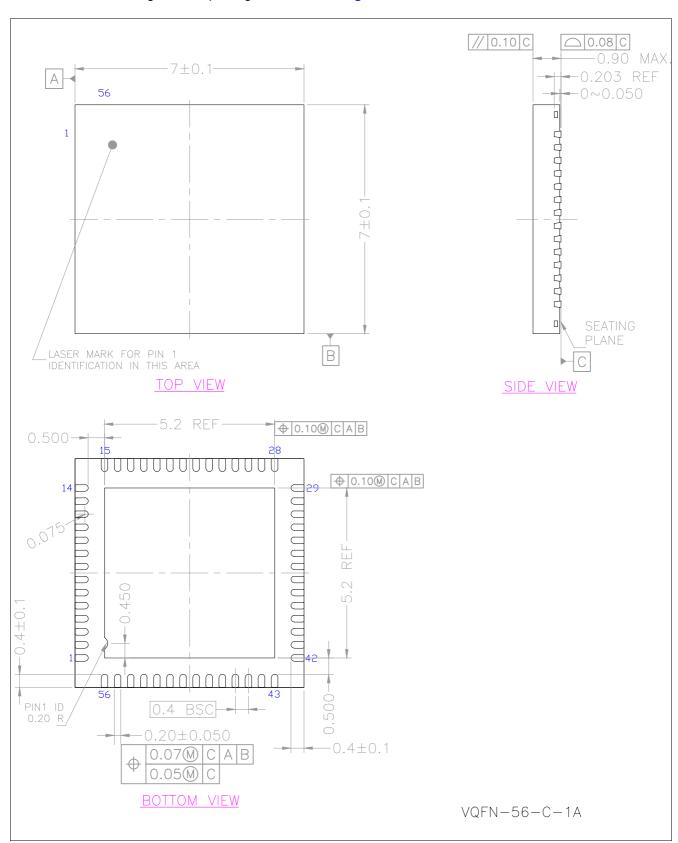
PG-VQFN-56 7 mm x 7 mm Package Outline
